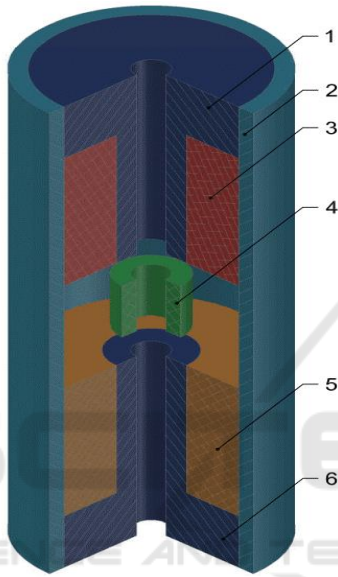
Principal construction of the studied actuator. 1 – upper core; 2 – outer core; 3 – upper coil; 4 – moving permanent magnet; 5 – lower coil; 6 – lower core.
